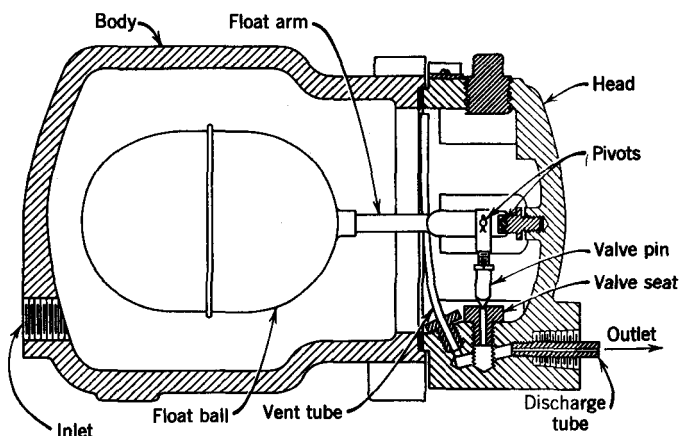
High pressure float valve. (Courtesy Alco Valve Company.)
